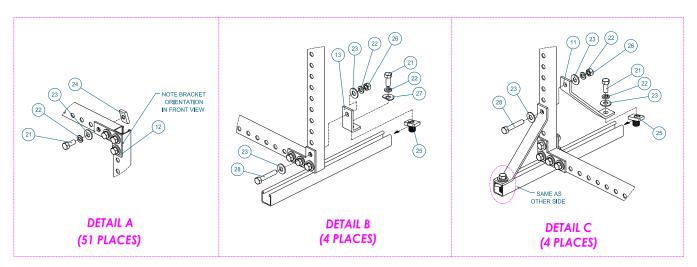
Uni-Strut Assembly, Hardware Placement
